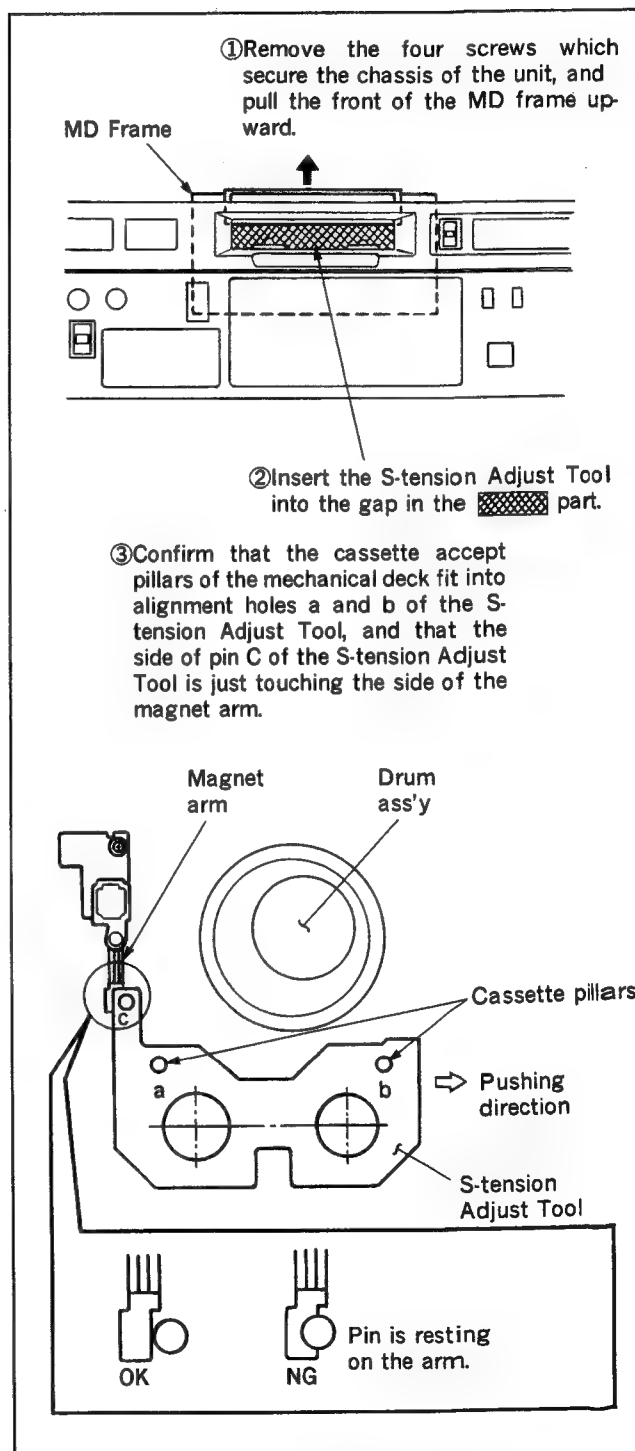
How to Set the S-tension Adjust Tool
